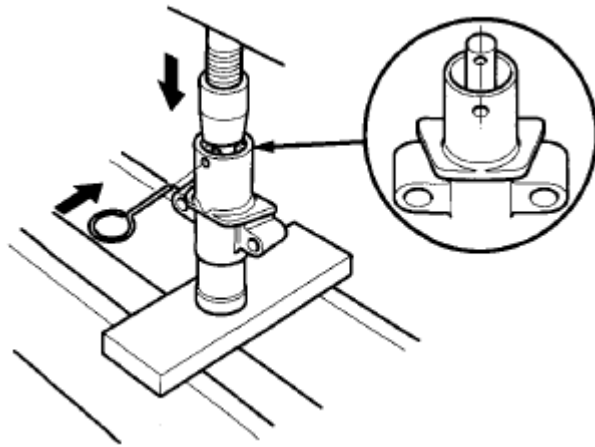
Aligning Holes On Rod And Housing Of Auto-Tensioner
